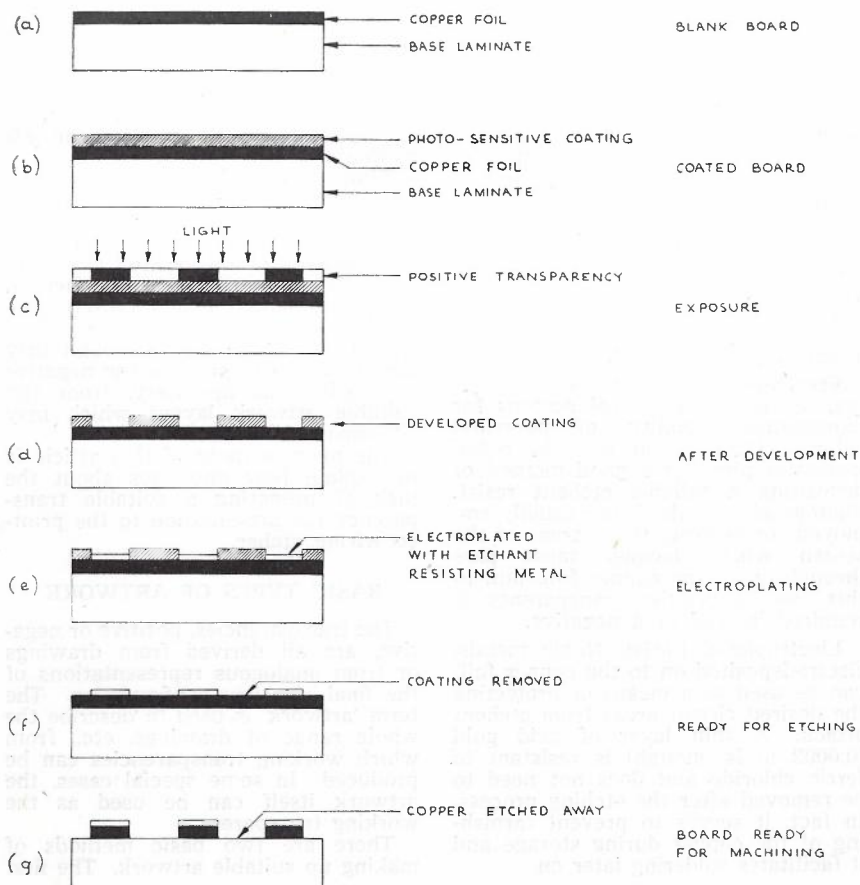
Manufacture of a Printed Wiring Board by the Electroplated-Resist Technique.
